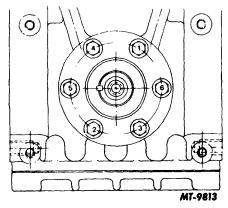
Crankshaft Seal Plate Capscrew Tightening Sequence 6 Bolt Mounting
